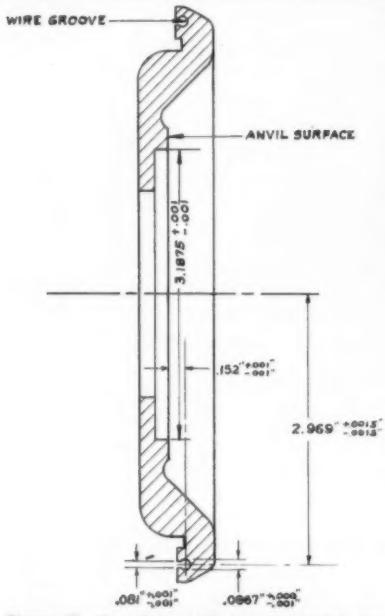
Figure II. Drawing of electric typewriter bar segment showing over-all dimensions and close tolerances.
